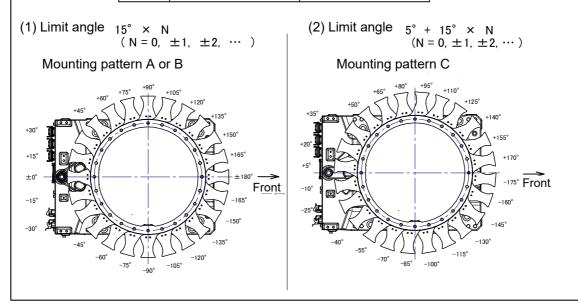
(f) Mounting the J1-axis adjustable mechanical stopper (2/3) (R-2000*i*C/100P/100PH/270F/270R/190S/210L/190U)
